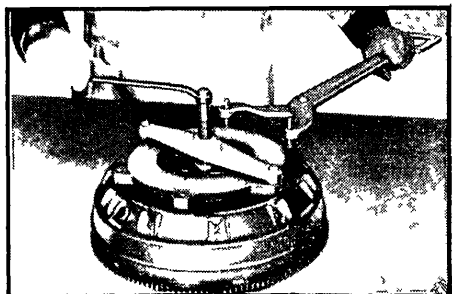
D Removing clutch driving plate from fluid drive, 1939-52
